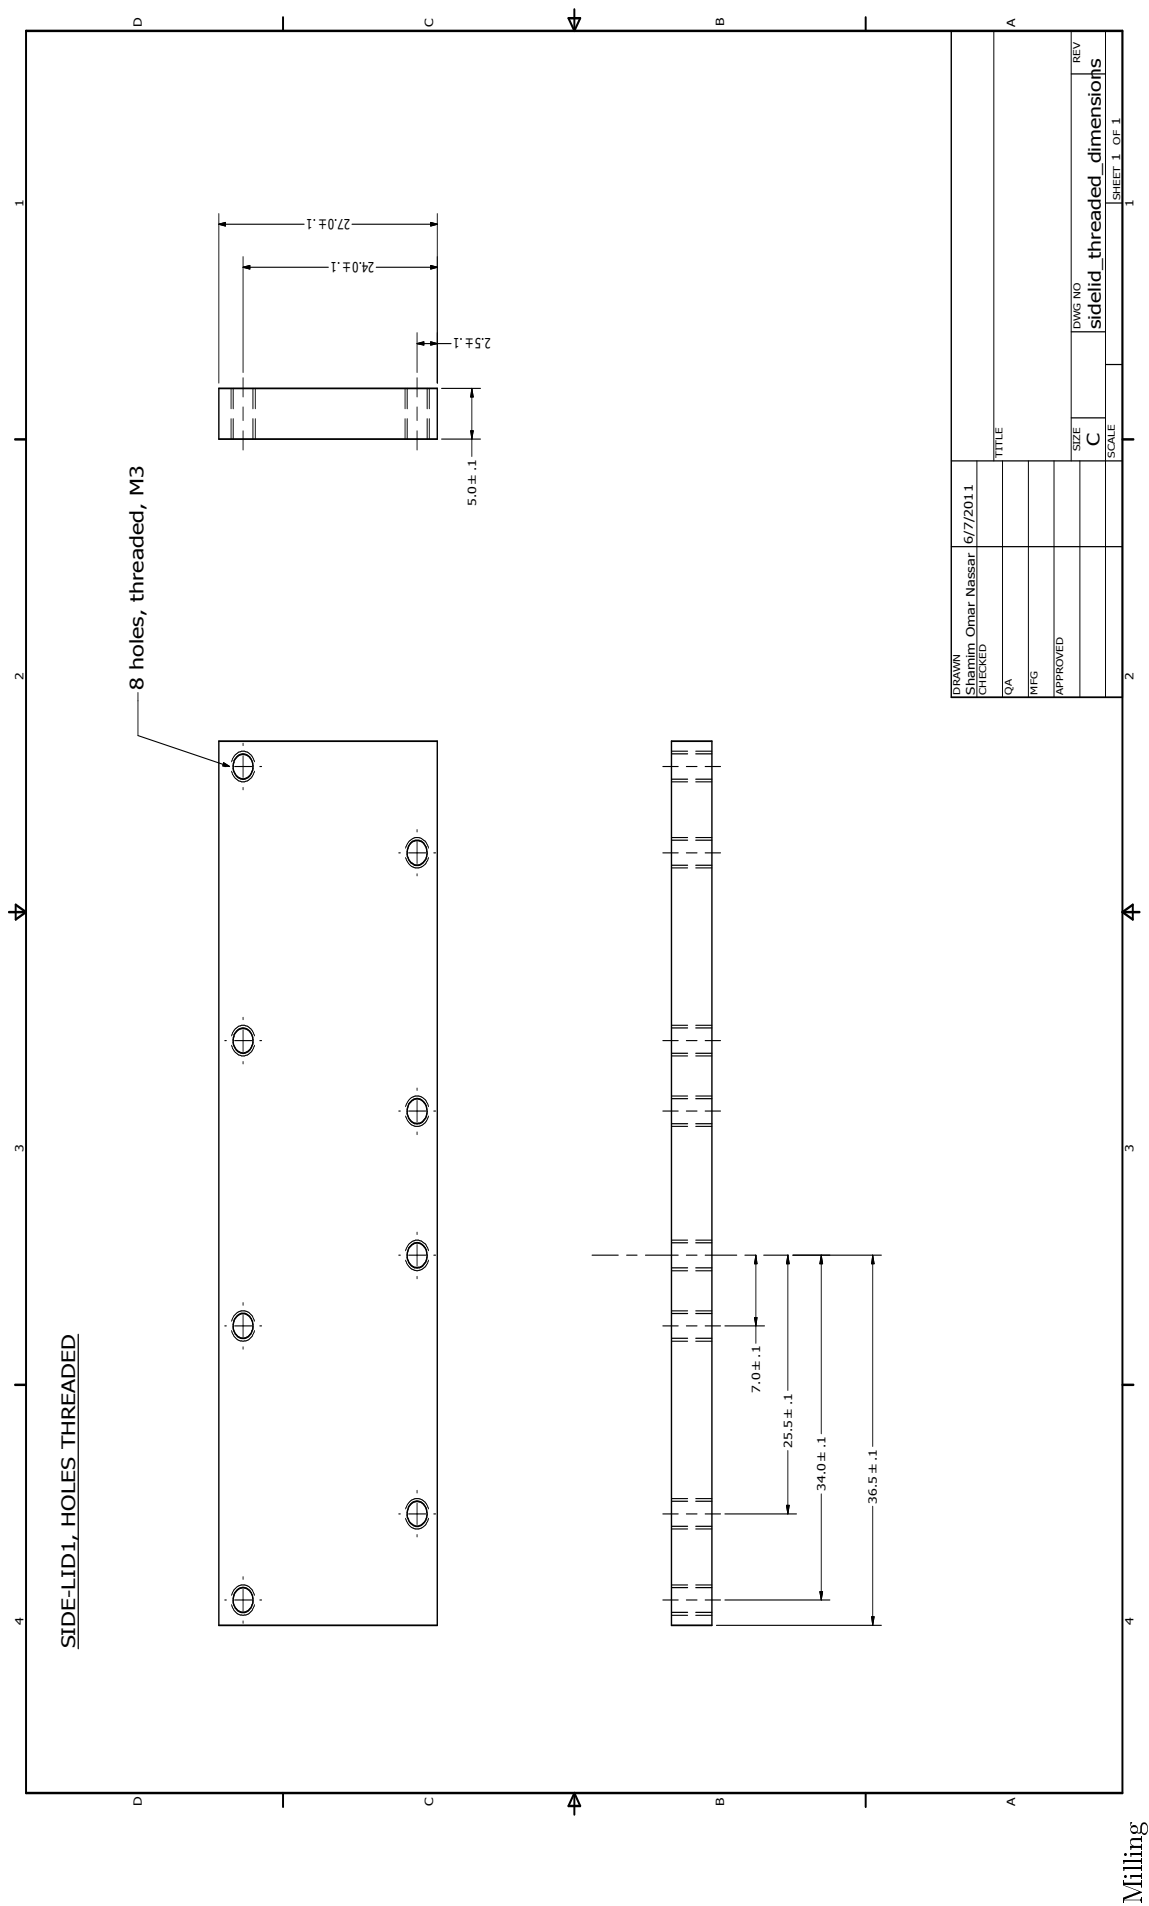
2.125GHz Combine Filter Sidelid Dimensions with Threaded Holes
